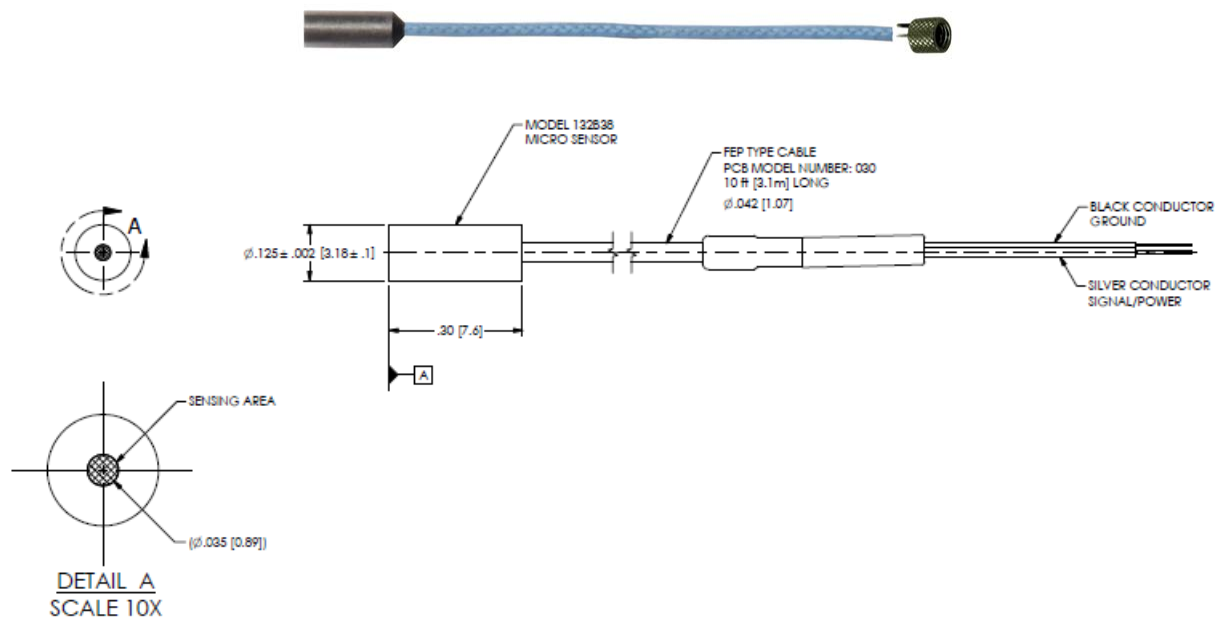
PCB Model 132B38 acoustic pressure microsensor—photo and technical drawing.
